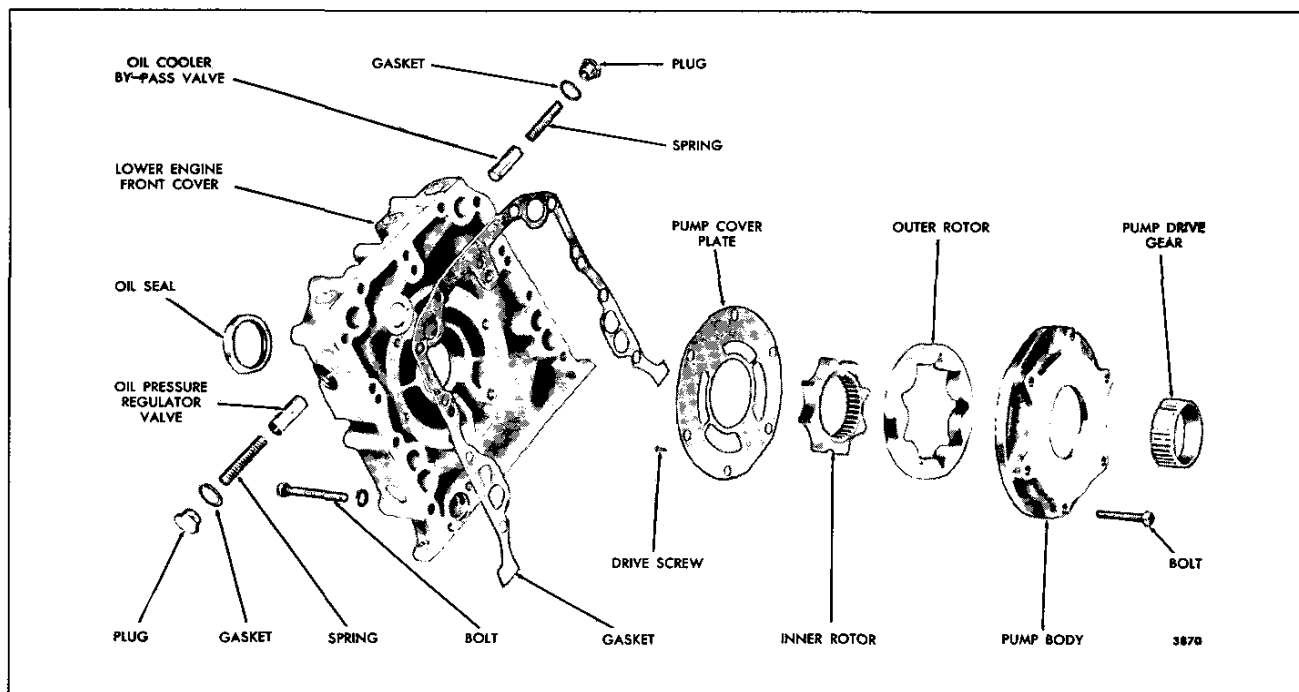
Oil Pump Details and Relative Location of Parts (Current)
